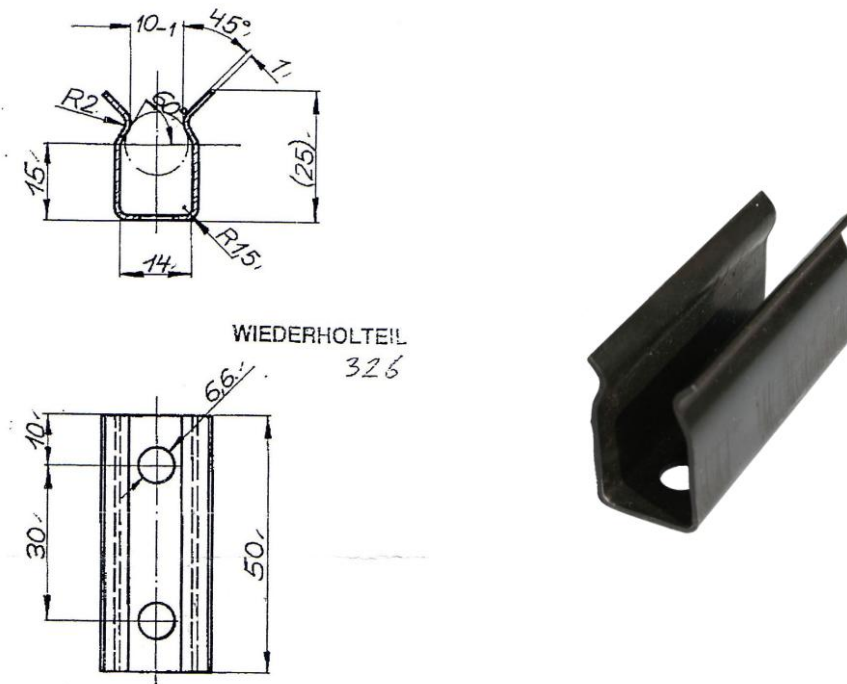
The original drawing of the component, with a photograph of a supplied clip.
